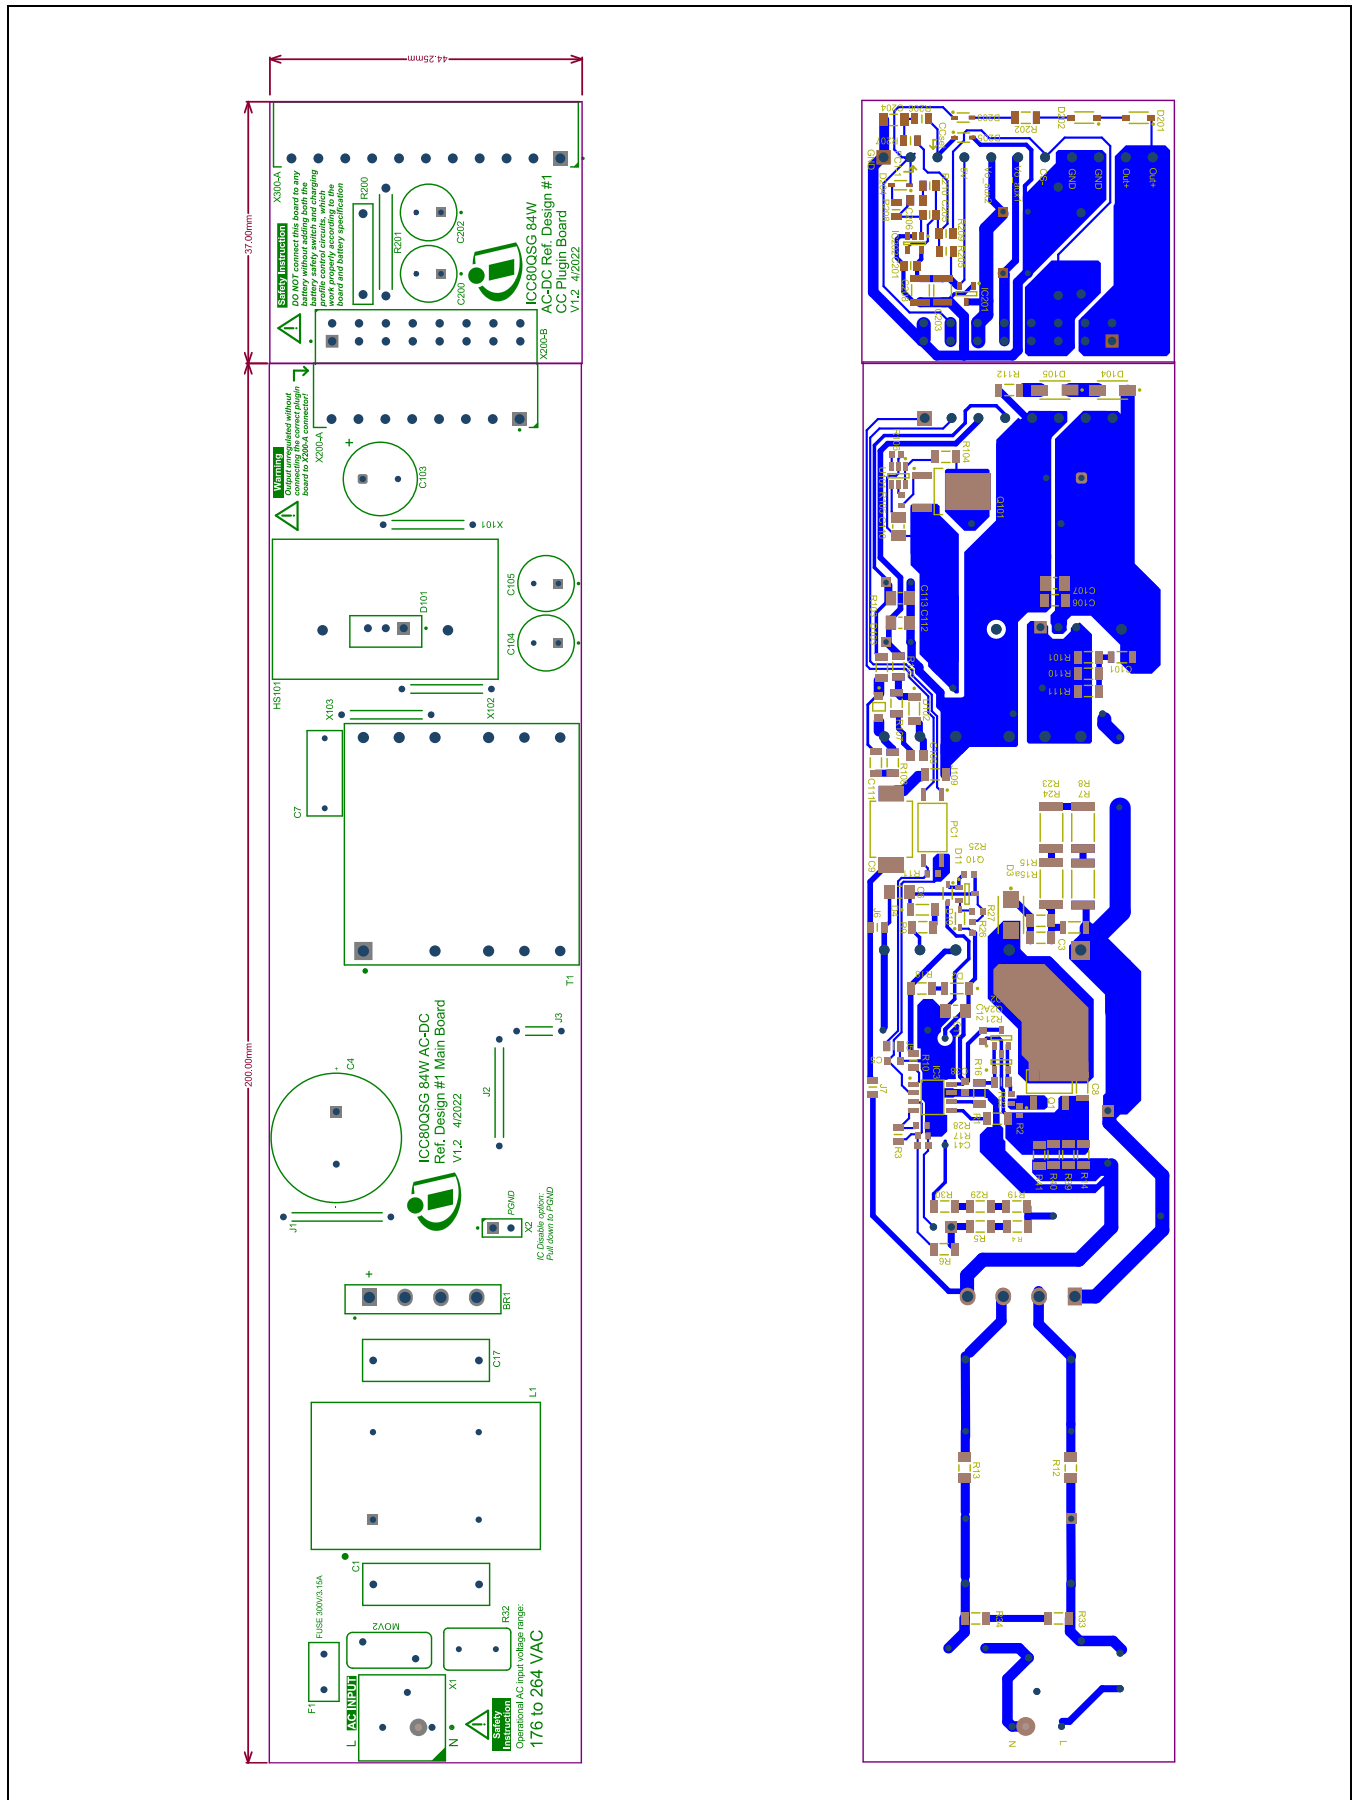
PCB top (left) and bottom (right) layout of the main board and CC plug-in board
